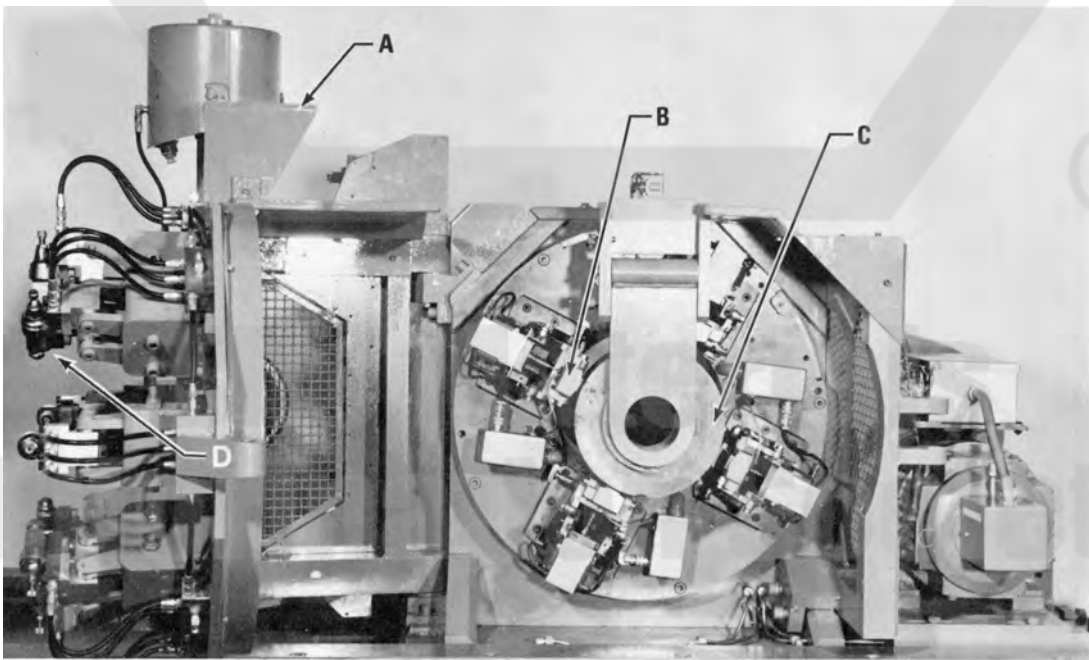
Unit used for the probe type eddy current inspection of seamless steel tubing; A, outer cover, containing test head, in open position; B, one of four rotating eddy current probe coils; C, reference standard test piece in position for calibration; D, one of eight paint spray guns for marking. Source: Ref 1
